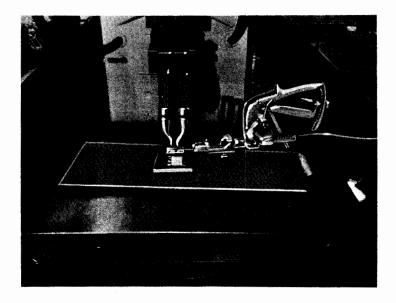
Band pulled tight with stretching tool—ready for spot welding
